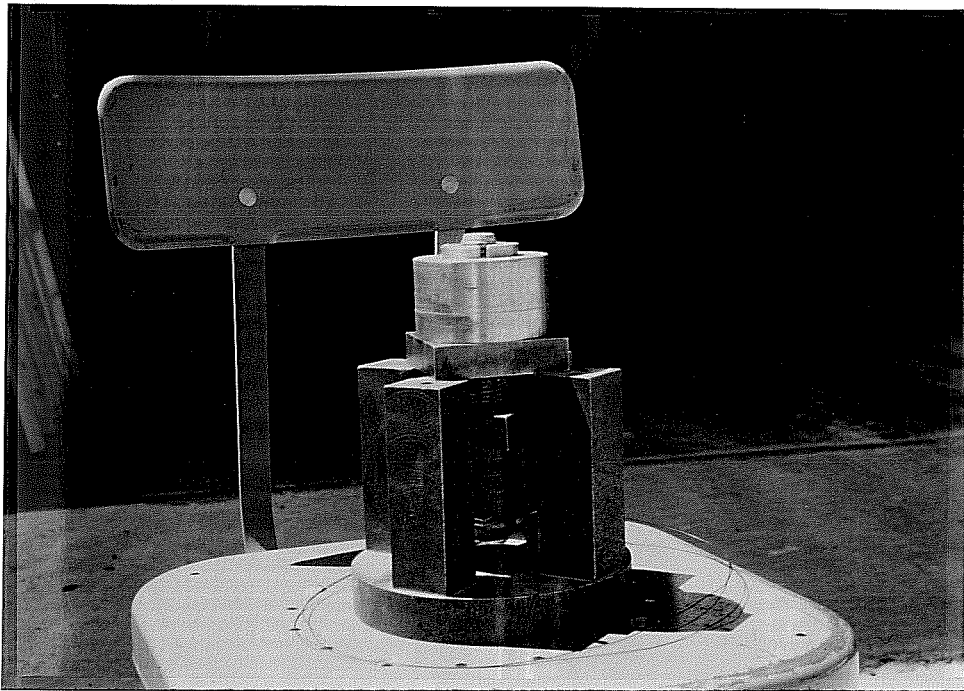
Bolt tail gripping jig installed on a Huck fastener
